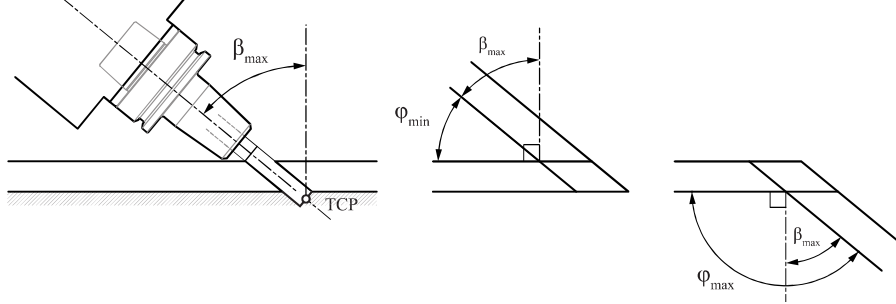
Fabrication Constraints. Side-cutting technique used for the automated fabrication of 1DOF edgewise joints with common 5-axis CNC routers. The maximum tool inclination β_{max} results from the tool and the tool holder geometry. From this we obtain the range of possible *dihedral angles* $\pm\varphi$ between panels.
